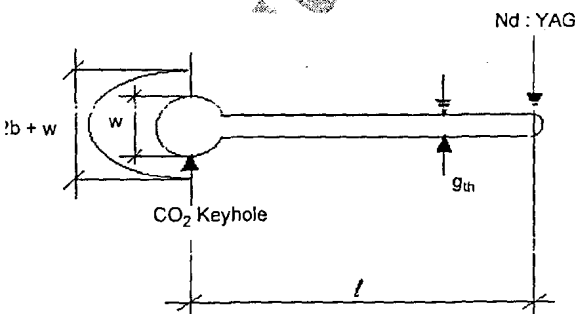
The cut and weld model showing slot and keyhole sizes.
